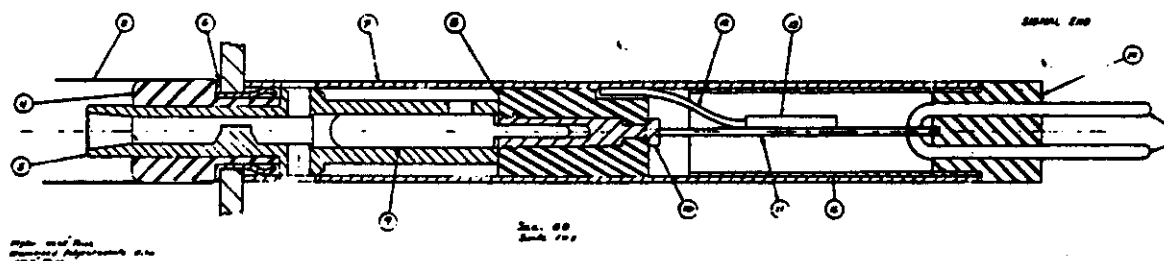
The proposed straw-tube end plug on the signal end. 2: the straw tube; 4: aluminum insert; 5: Ulem feedthrough; 6: collar spring; 7: metallic sleeve; 8: plastic socket; 9: taper pin; 10: pin socket; 11: G-10 board with anode lead on bottom; 12: cathode lead; 13: blocking capacitor; 14: plastic collar; 16: Mylar sleeve. The anode- and cathode-signal pins at the right end plug into the front-end electronics board. The vertical plate at the left is made of Macor.
